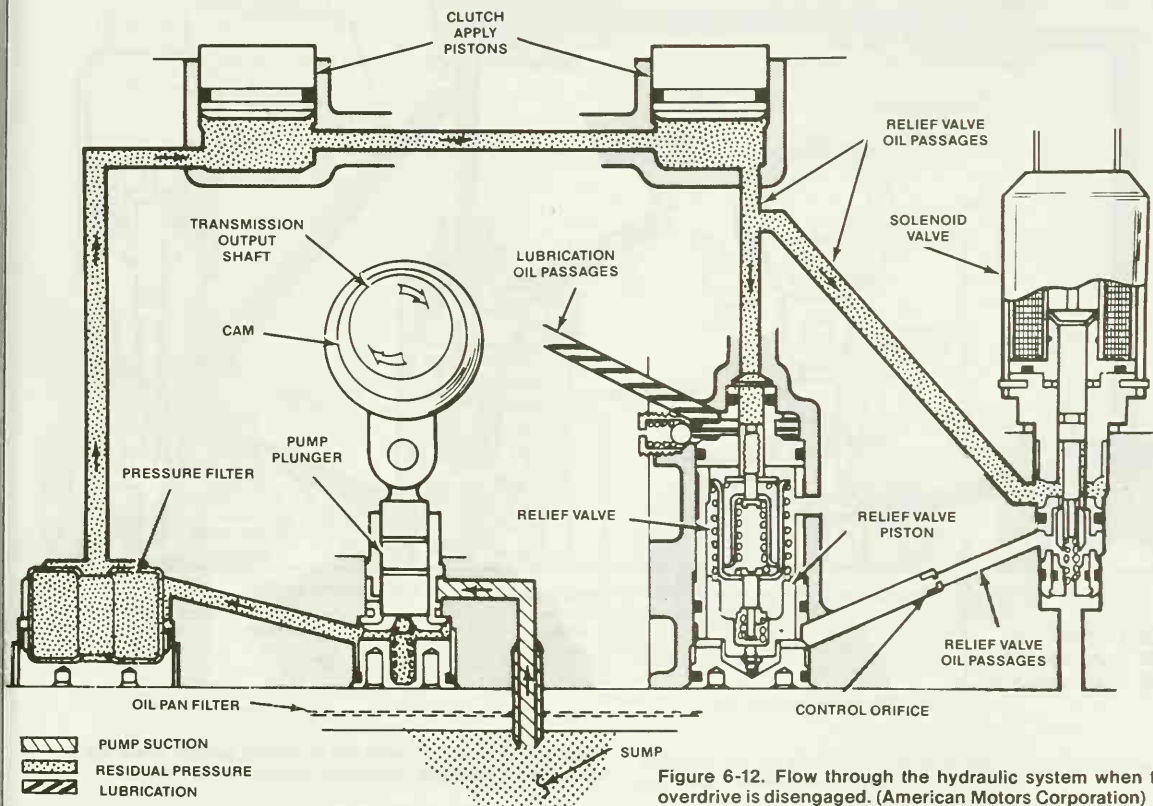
Flow through the hydraulic system when the overdrive is disengaged. (American Motors Corporation)
